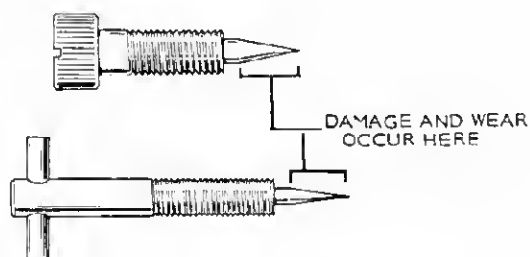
MIXTURE NEEDLE INSPECTION
